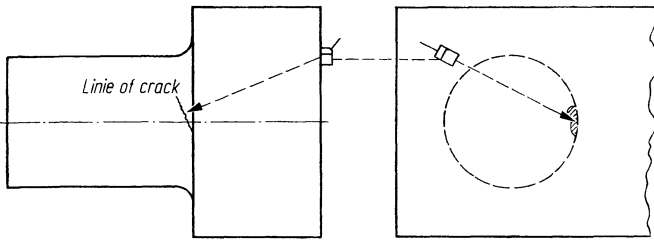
Oblique or skewed fatigue cracks on crankpins
